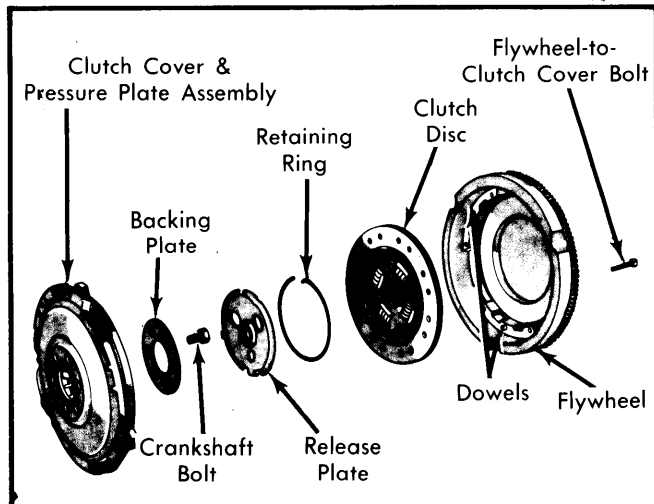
Exploded View of Chrysler Corp. Clutch Assy. (Horizon, Omni & Rampage Shown)
